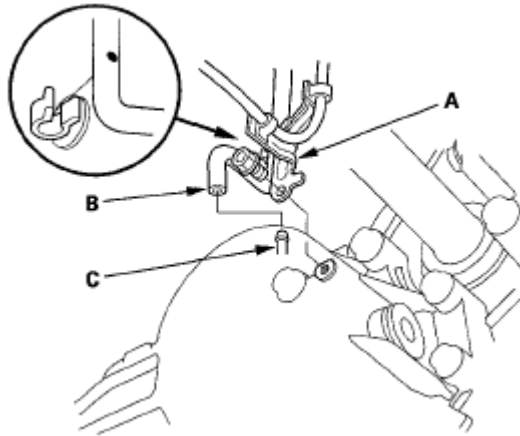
Identifying Transfer Breather Tube Bracket, Breather Tube And Breather Pipe
